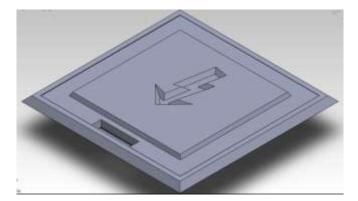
The Combination of engineering drawing for Hole Cover and Frame.
